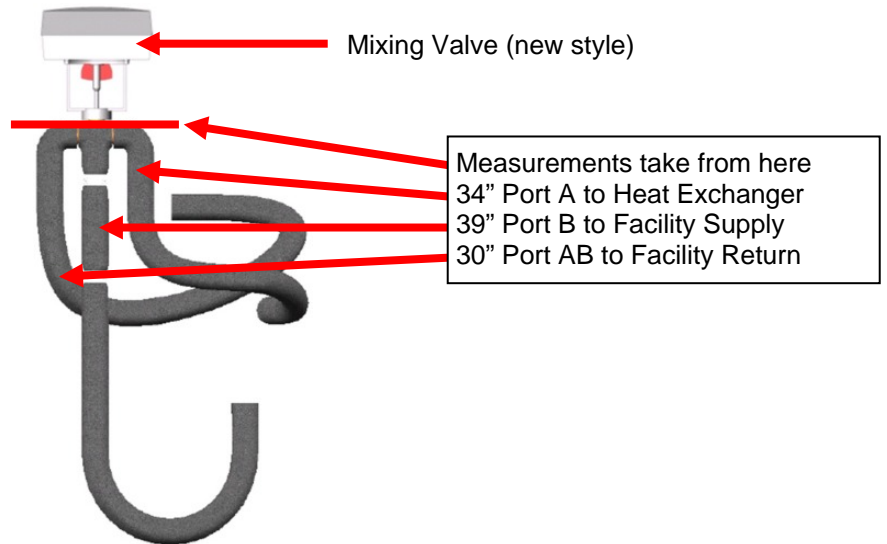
Connections for the Chilled Air Mixing Valve Kit
